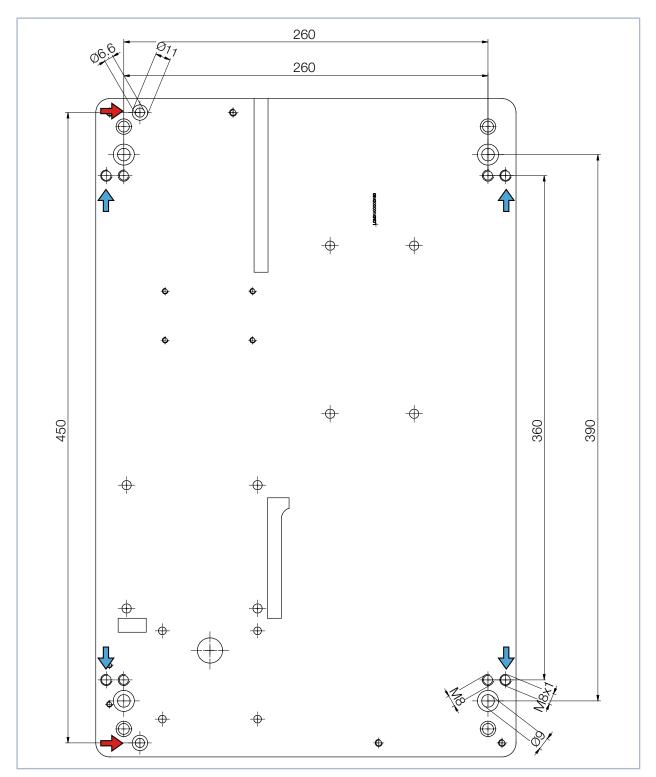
Fastening bores and alignment threads HP-LQM II with bottom plate
